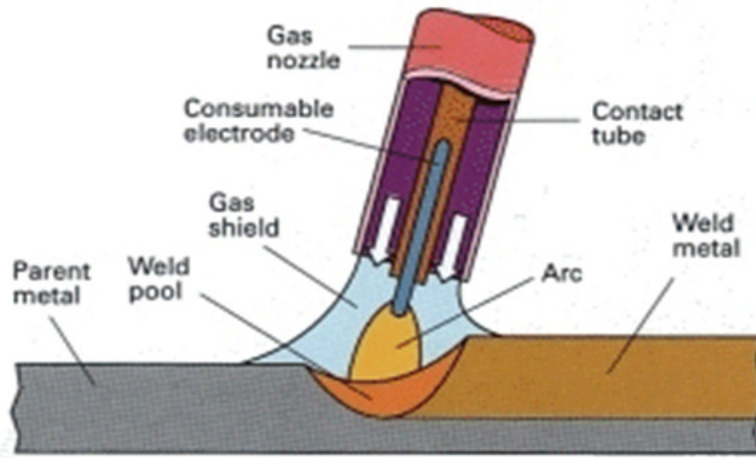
Representing the metal active gas welding [Science Direct].
